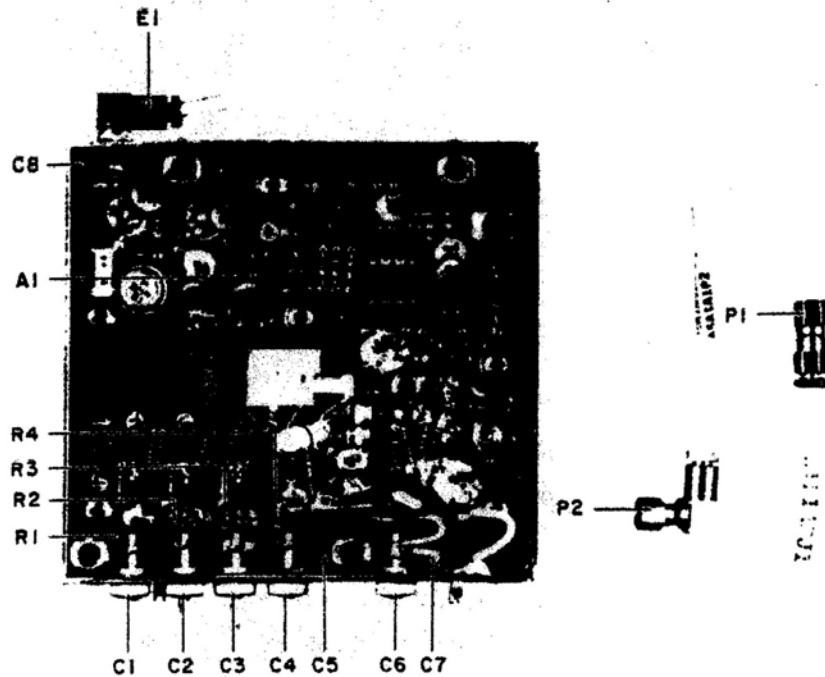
Type 791629 1st LO VCO Assembly (A5A1A1), Location of Components
